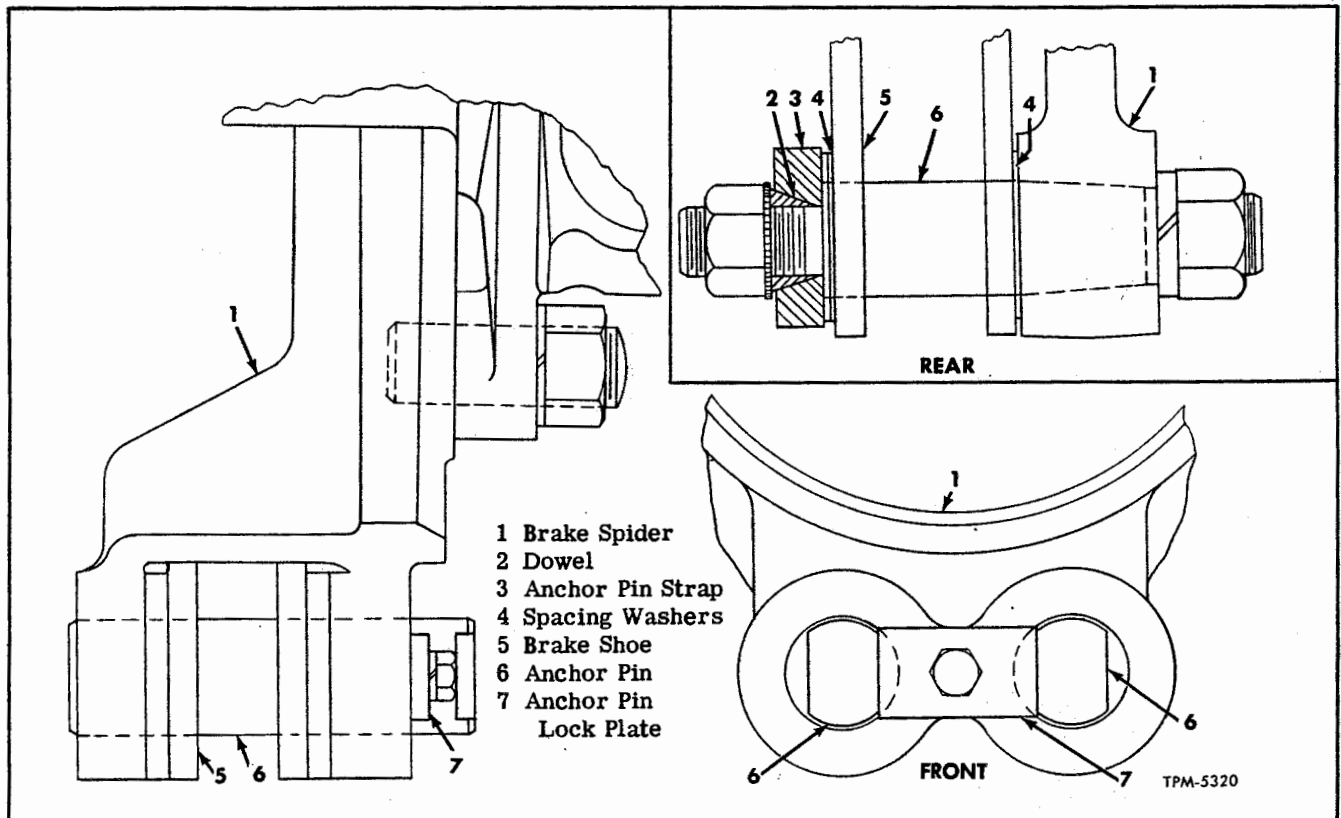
Front and Rear Brake Shoe Anchor Pins Installed
